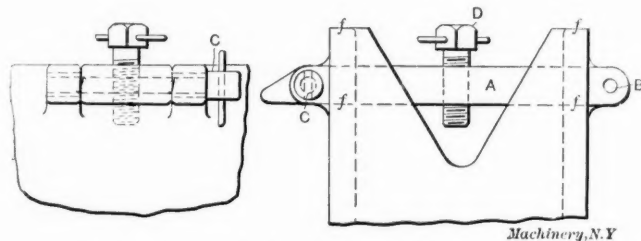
Common Design of Leaf in Drill Jigs. Screw D
